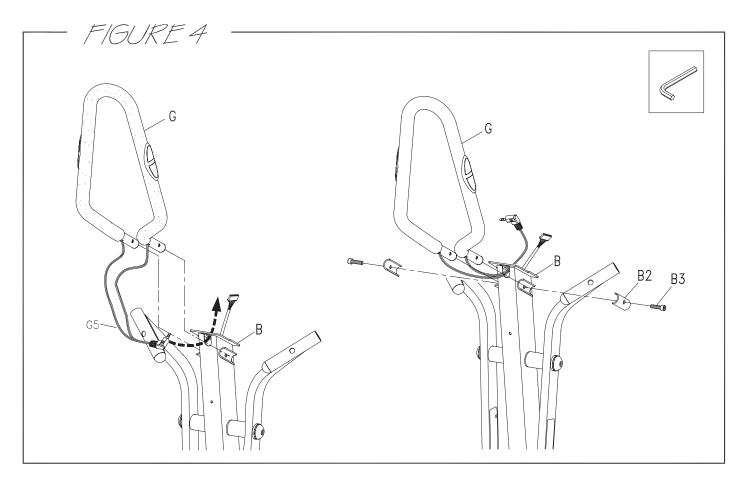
ASSEMBLY FOR SMALL HANDLE BAR
